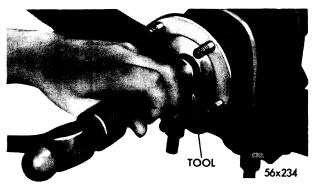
Installing Axle Shaft Inner Oil Seal with Tool 839
